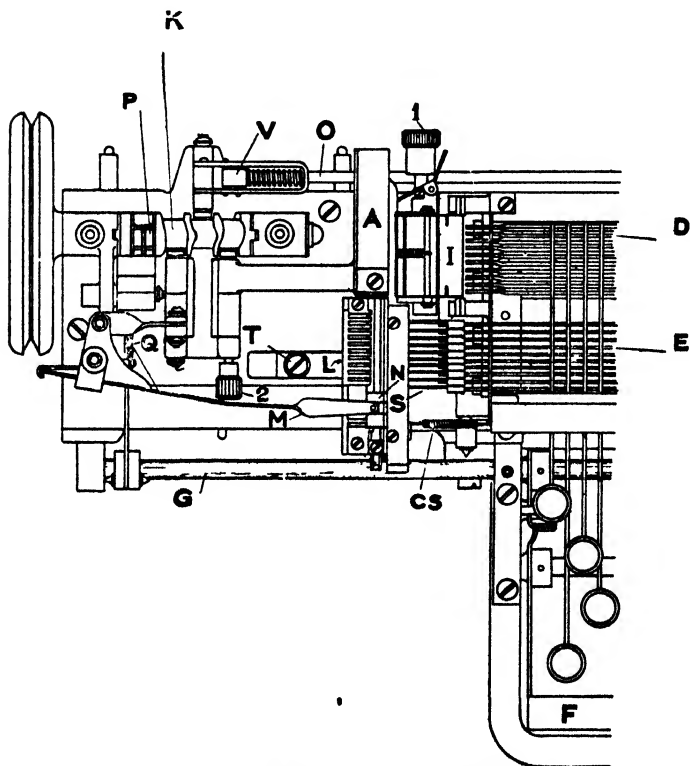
PART OF THE MECHANISM OF THE MORSE KEYBOARD PERFORATOR.
